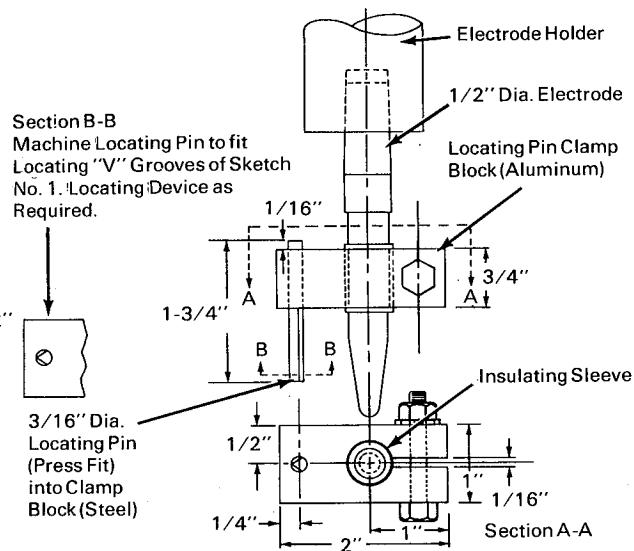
Locating Pin and Upper Electrode to be used with Spot Locating Device Illustrated in Figure 1.
